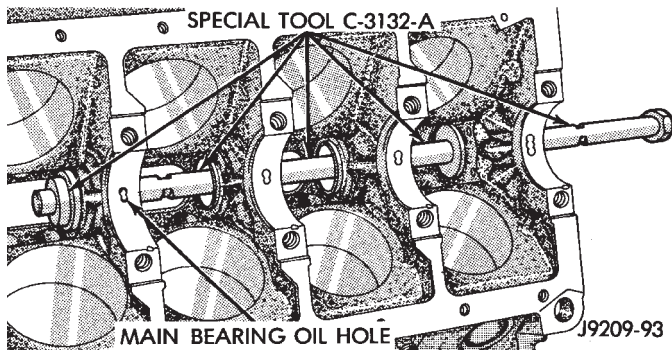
Camshaft Bearings Removal/Installation with Tool C-3132-A
